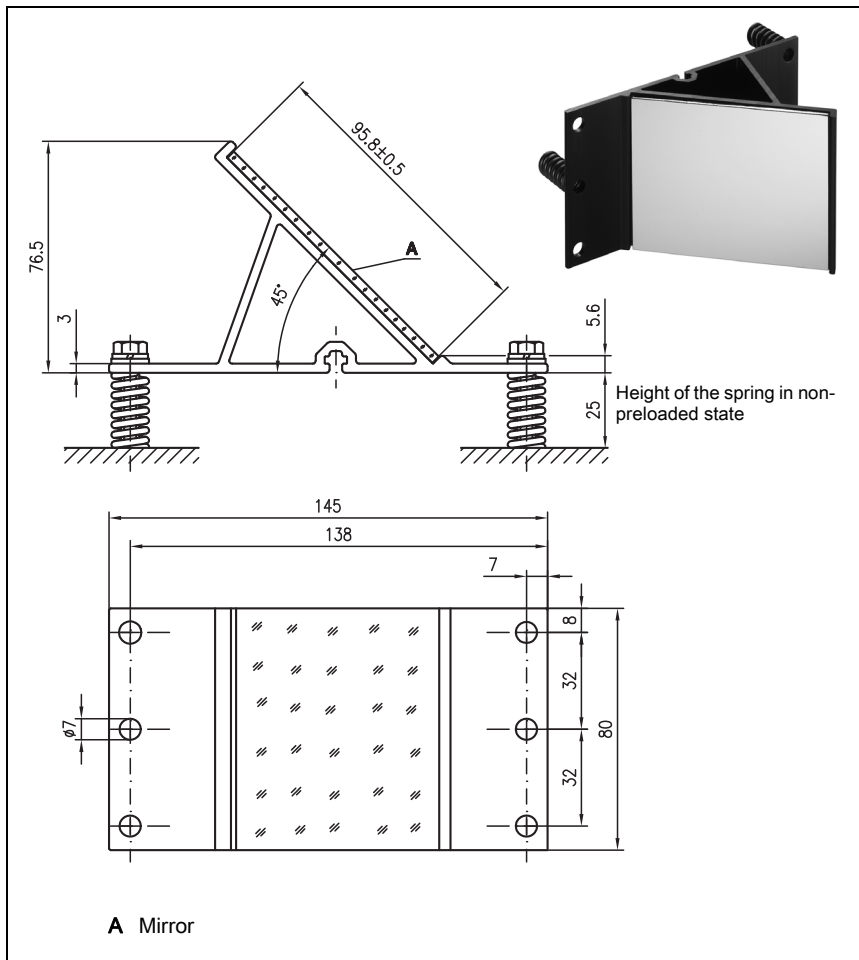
Photo and dimensioned drawing of the US 1 OMS deflector unit
